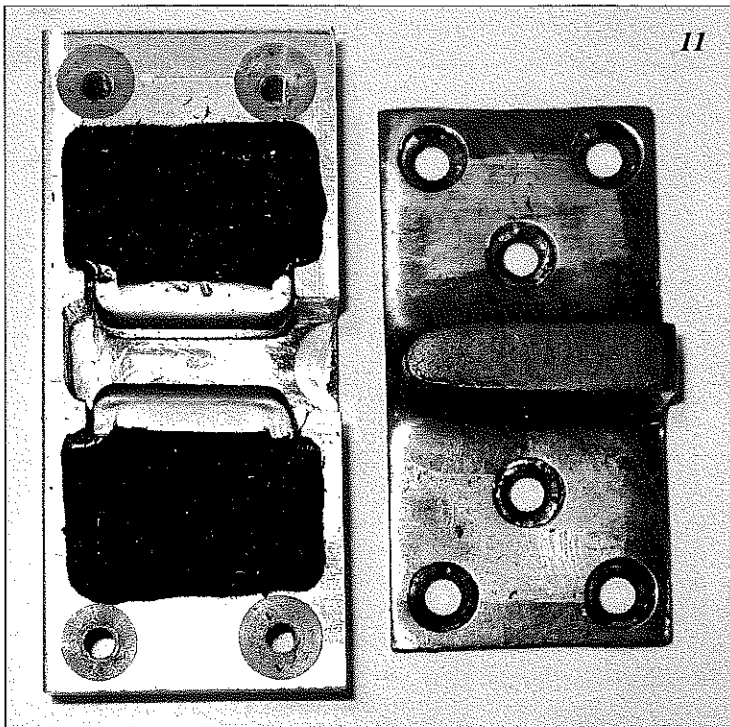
The completed housing with the rubber blocks installed. Pictured is the receiver housing with its companion wedge to show the relative size.
